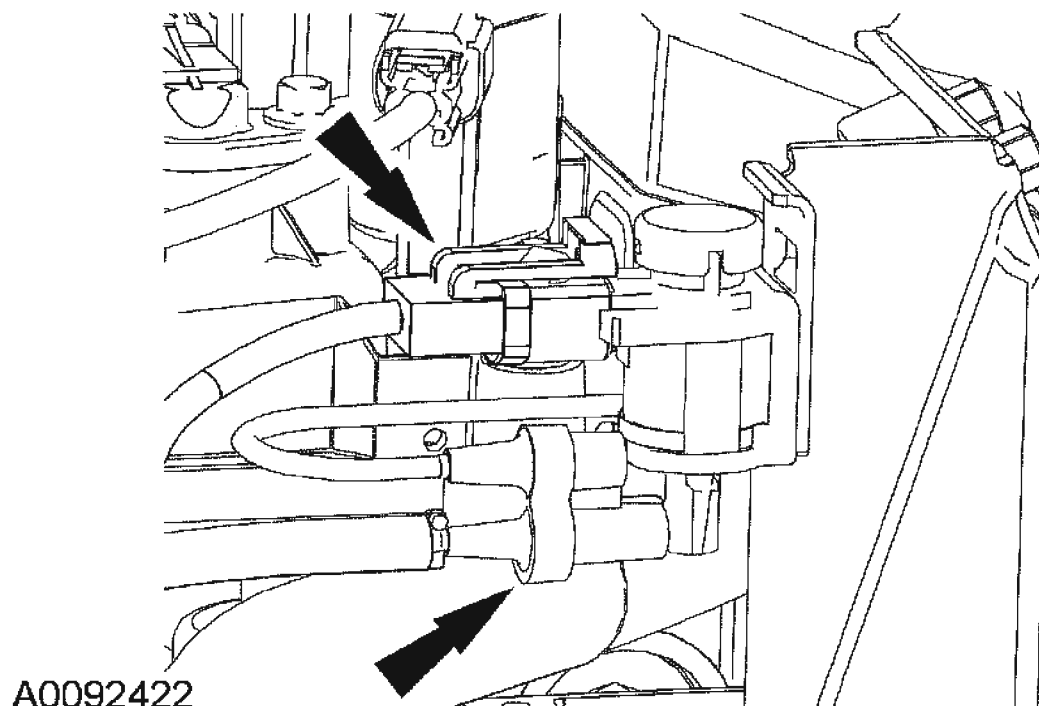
Connecting AIR Vacuum Regulator Electrical Connector And Vacuum Hose
